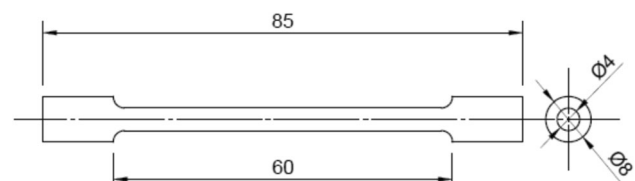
Engineering drawing showing the dimensions in mm of tensile test samples
